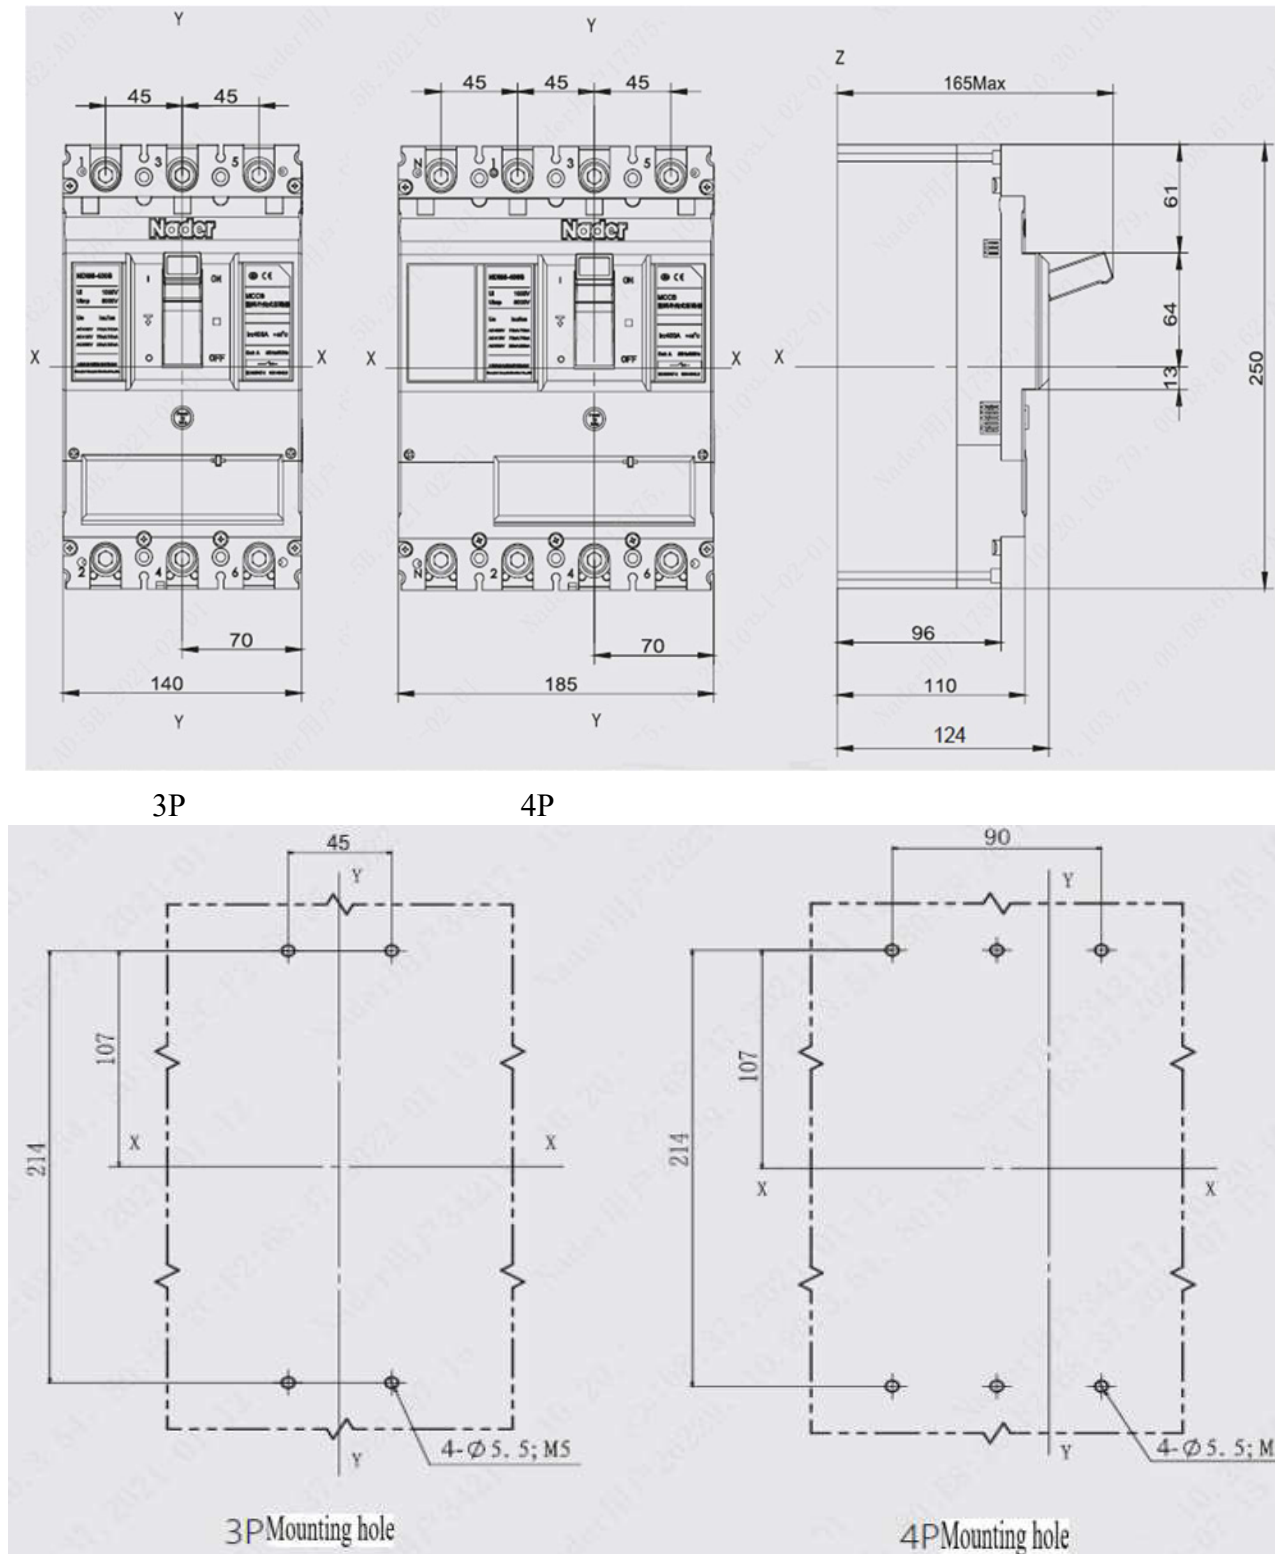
NDM5E-400/630 External Dimensions Of Front-Panel Connection Products
